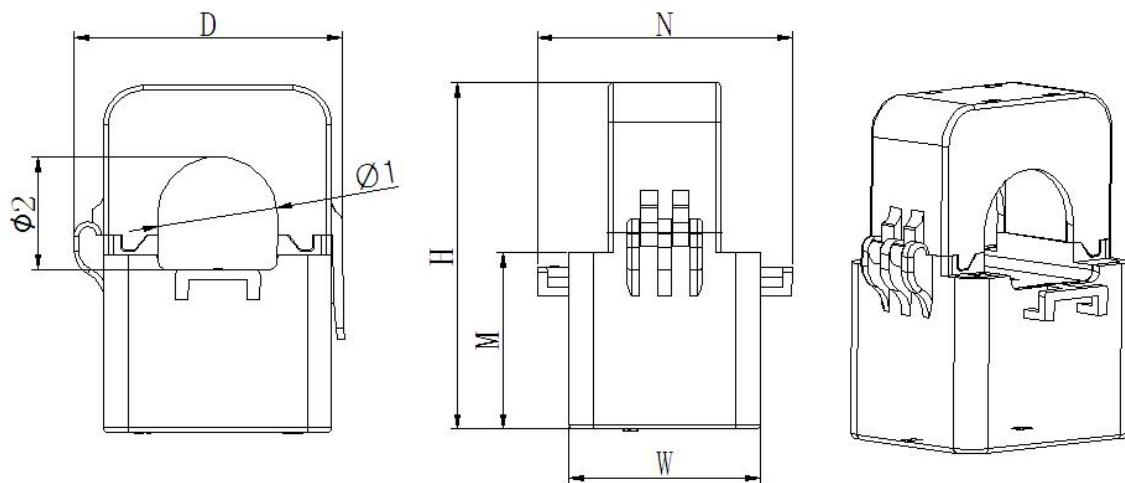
Dimension drawing of HCT16K-FJ for ADW300W auxiliary transformer
